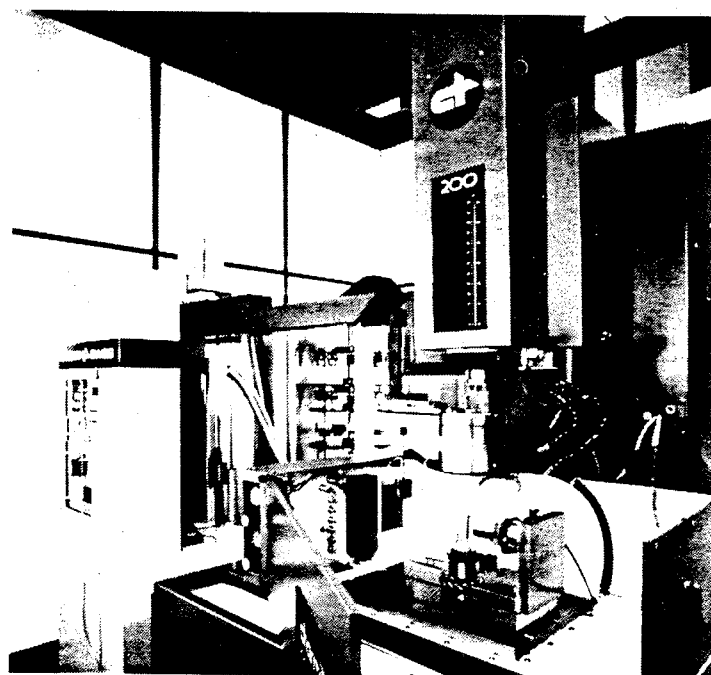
EDM machining Center Equipped with a Universal Handling Robot.
